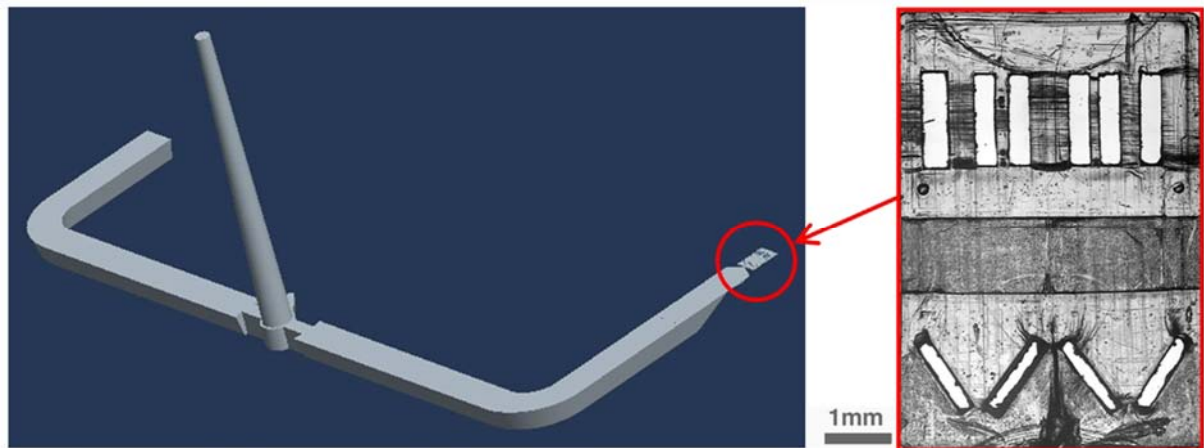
Sprue, runners and part (left); detailed view of the injection moulded part (right).
